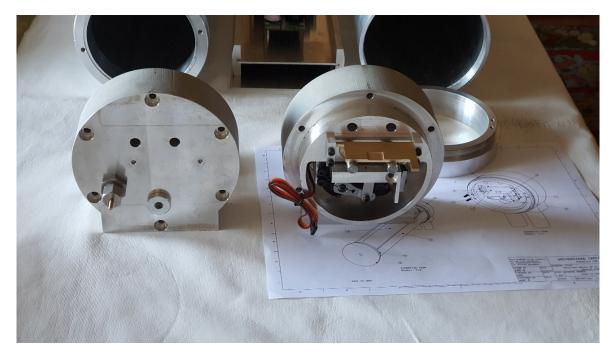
Rear View of Front Cover and all Fittings – Deployed, Vents Open
